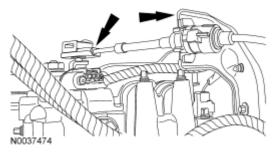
Locating Transaxle Control Cable From Control Lever Courtesy of FORD MOTOR CO.
